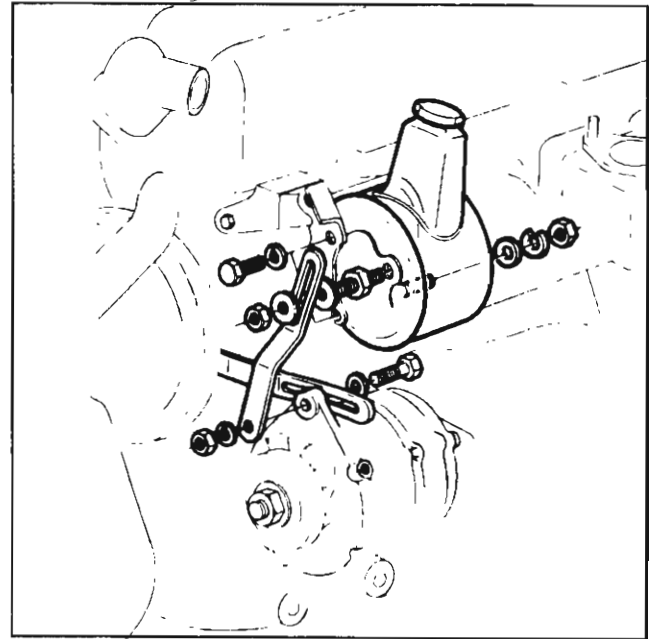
Power Steering Pump Mounting—6 Cylinder Engine
